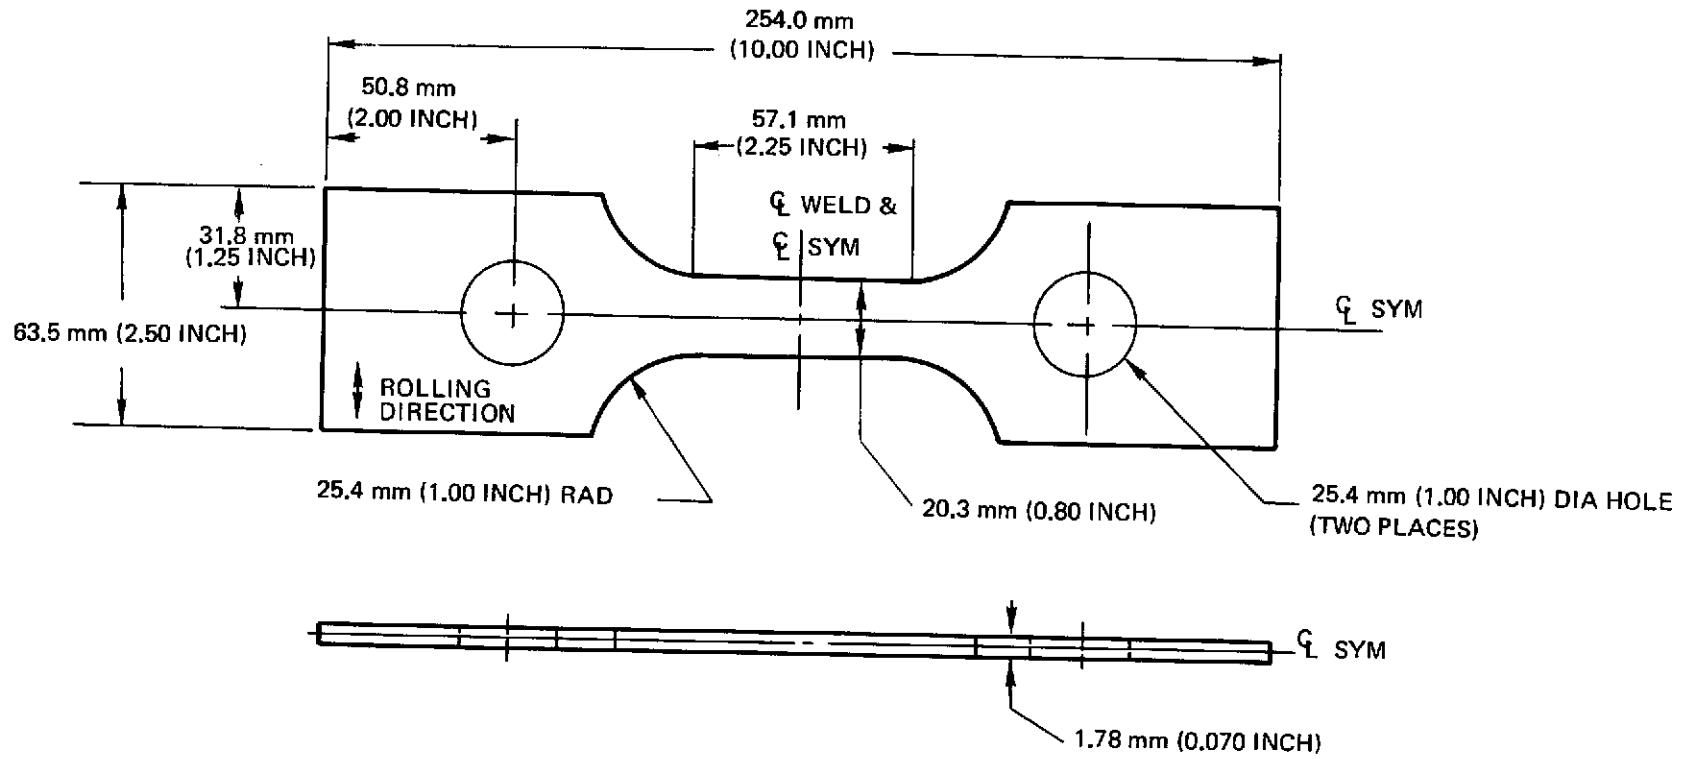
1.78 mm (0.070 INCH) X 20.3 mm (0.80 INCH) 6 AL-4V TITANIUM ALLOY WELDMENT SPECIMEN
